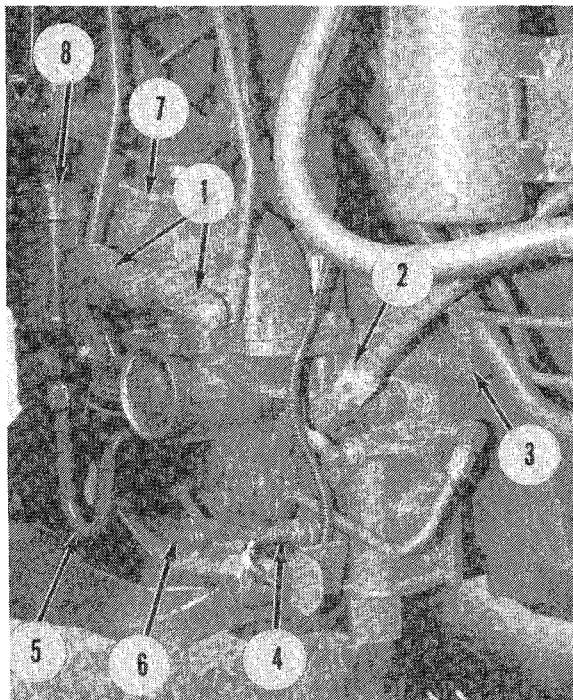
Transmission control valve housing is mounted on right side of transmission case.
